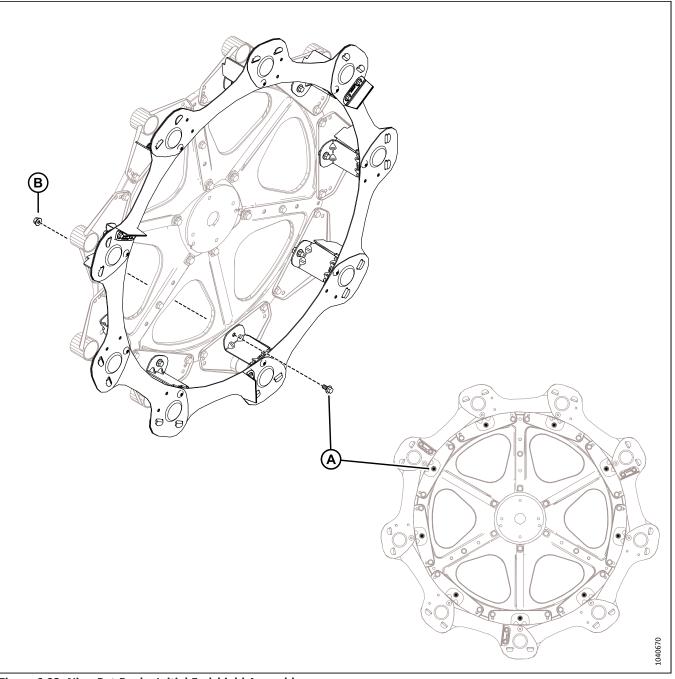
Nine-Bat Reel – Initial Endshield Assembly
